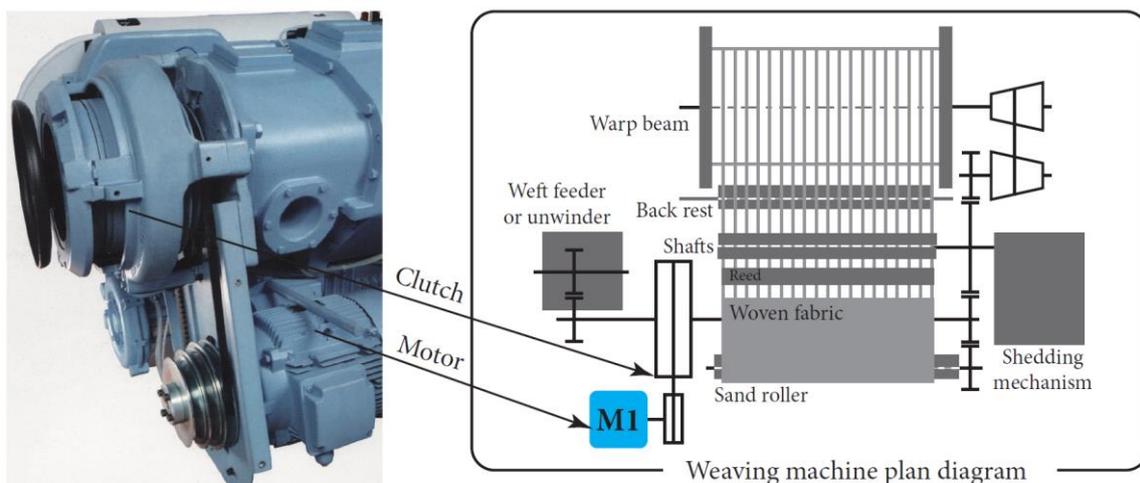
Structure of the drive type A, photographs of the motor and the mechanical clutch on the main shaft (source [14])
